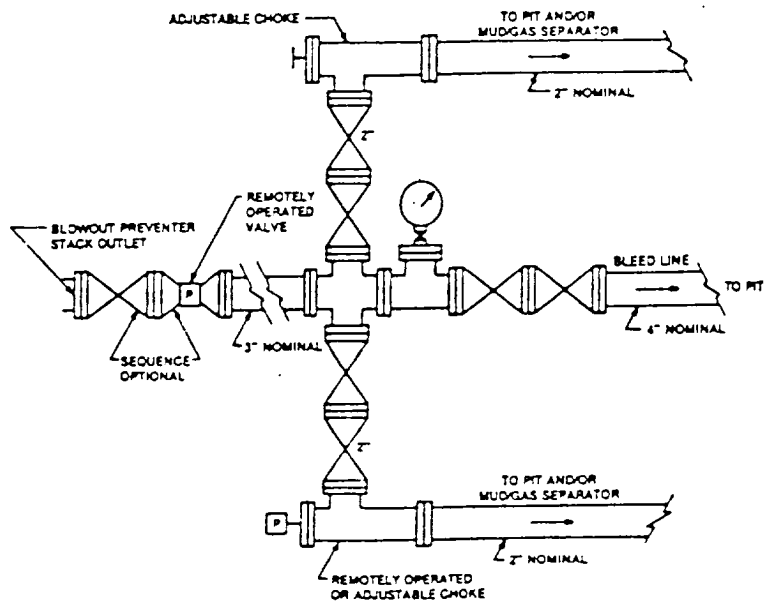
Typical choke manifold assembly for SM rated working pressure service — surface installation.
